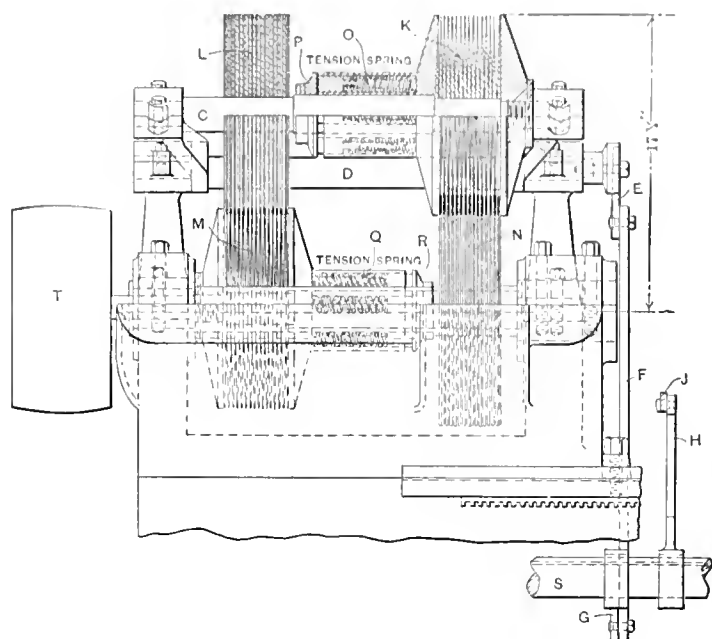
Suggested Arrangement of Dill Drive as Incorporated in the Head-stock of a 20-inch Lathe.
